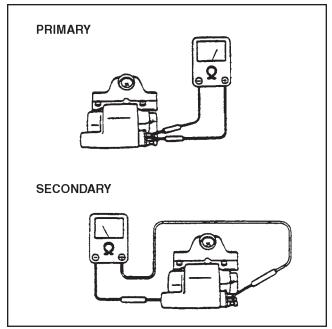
E-2. Ignition Coil Test, 3-Cylinder Engine
